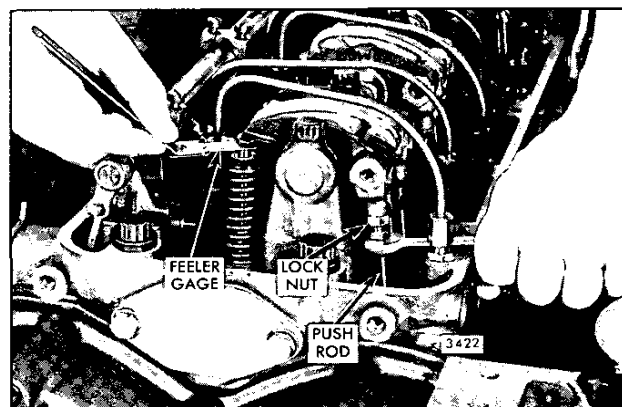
Adjusting Valve Clearance (Two Valve Head)
